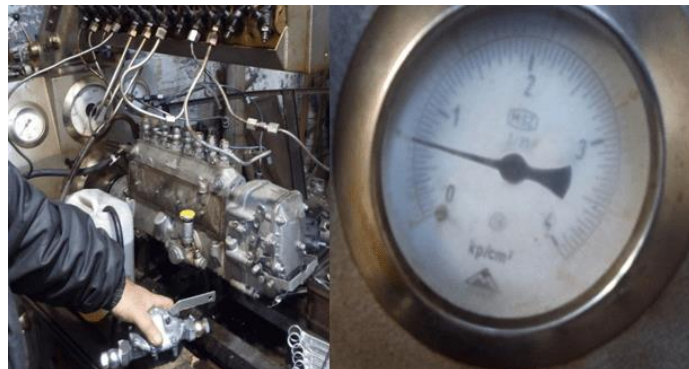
Testing a fuel pump created through CNC machining and 3D printing, with visualization of the pressure created.
